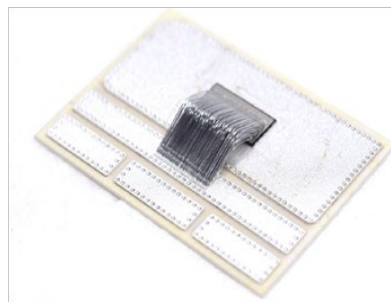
Silver-sintered on DCB with silver surface; top-side contact by 125um Aluminum bond wires
